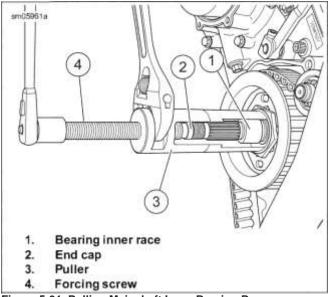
Pulling Mainshaft Inner Bearing Race Install
